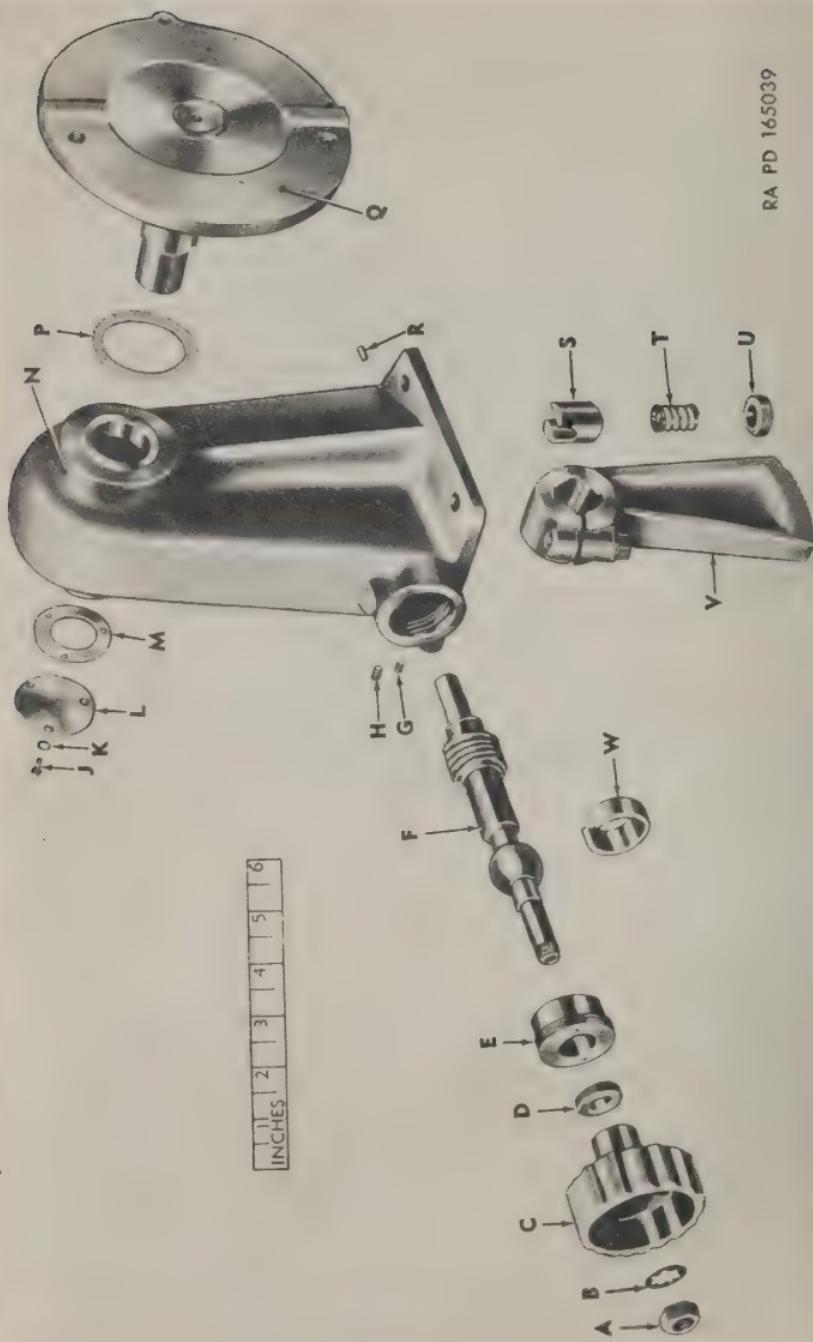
Telescope mounts M52C and M52D—elevation worm housing assembly—exploded view.
